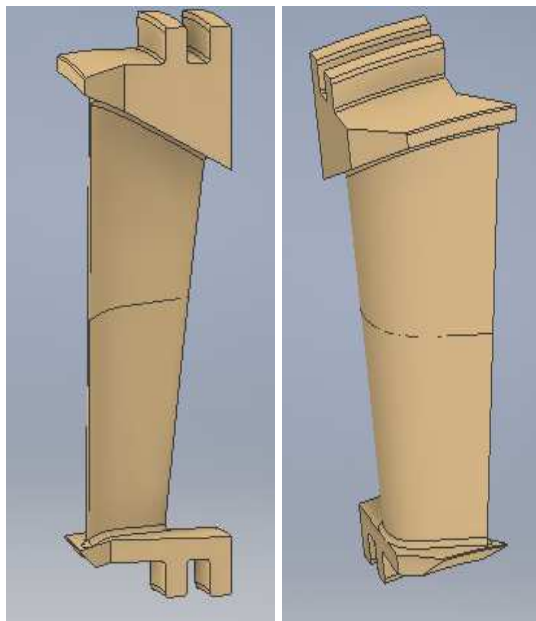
Isometric View of Switchgear and Stator Blades Models [Custom Processing]
